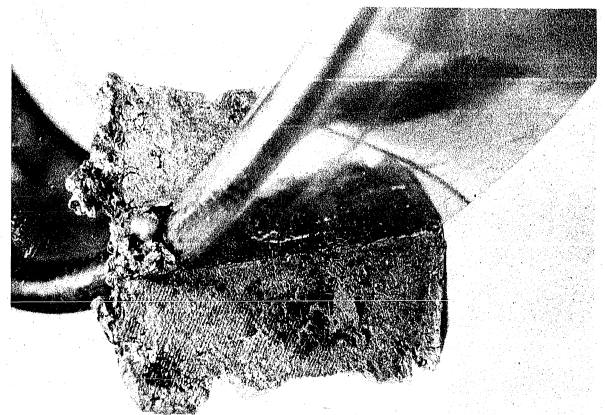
CLOSE-UP PHOTOGRAPH OF P/N 226966 SHOWING THE FLASH-BUTT WELD
